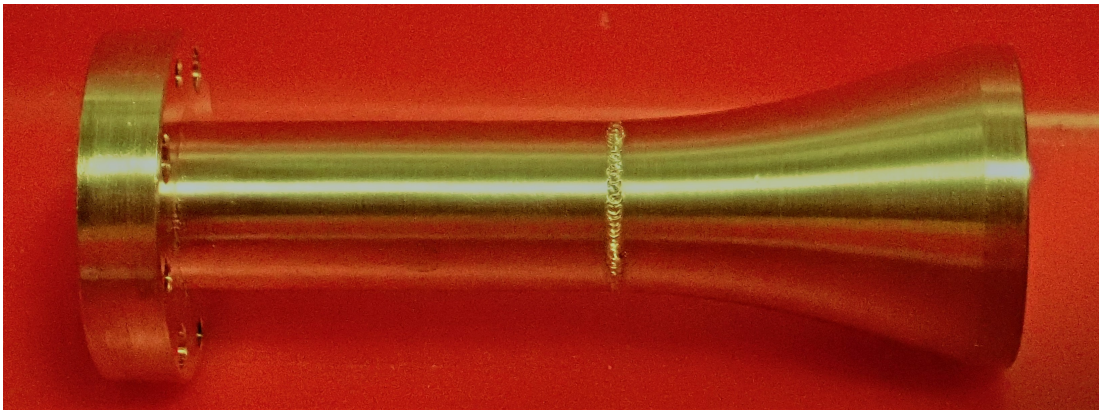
Horn 3. The total length of the horn is 46.138 mm including flange (4.5 mm), circular waveguide (22.5 mm, on the left of the welding), transition section (12.138 mm, on the right of the welding) and conical section (7 mm).
